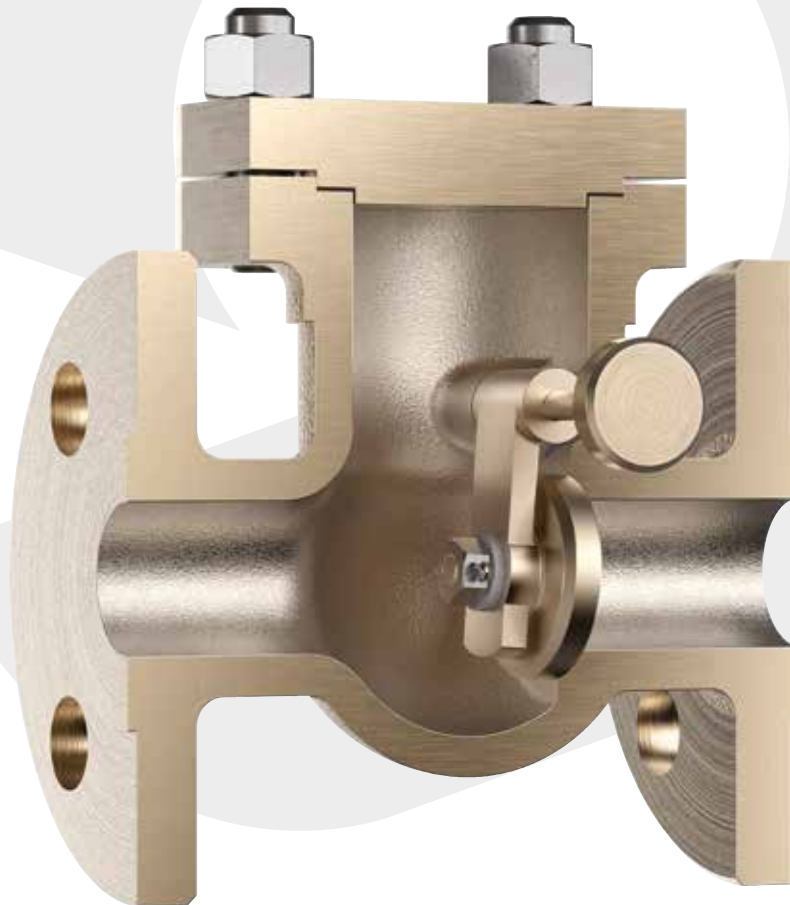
Swing check valve (SC04) cutaway with bolted bonnet - 3D exploded view
